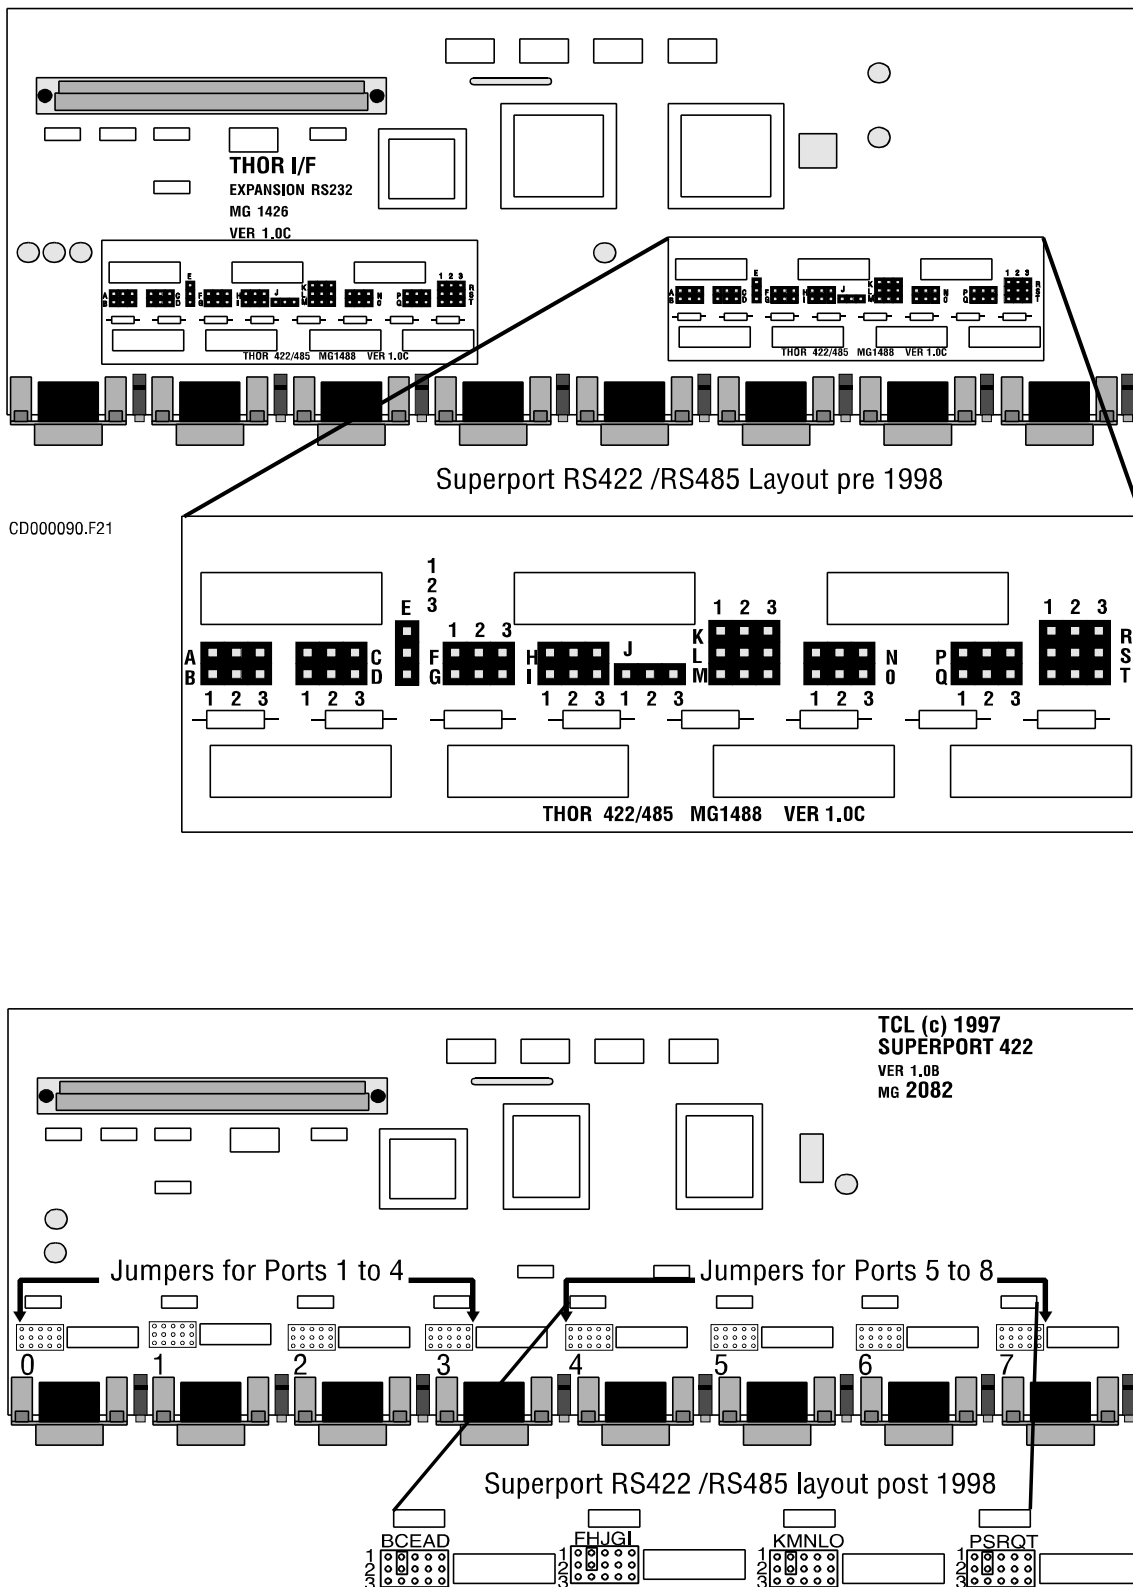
Superport Layer PCB showing position of RS422/RS485 Jumpers
